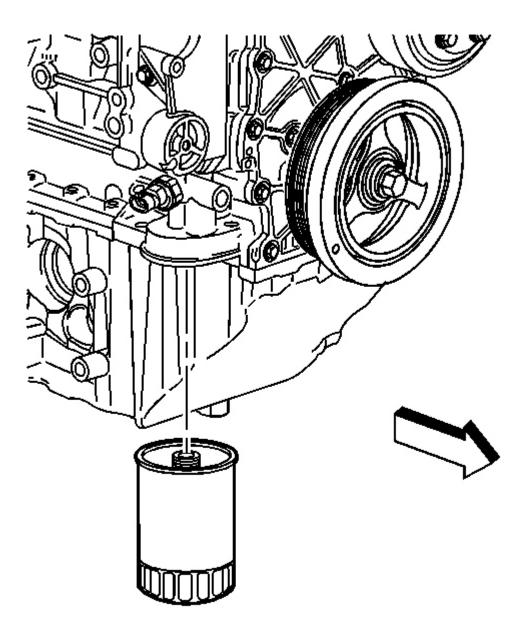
Locating Oil Filter Courtesy of GENERAL MOTORS CORP.
